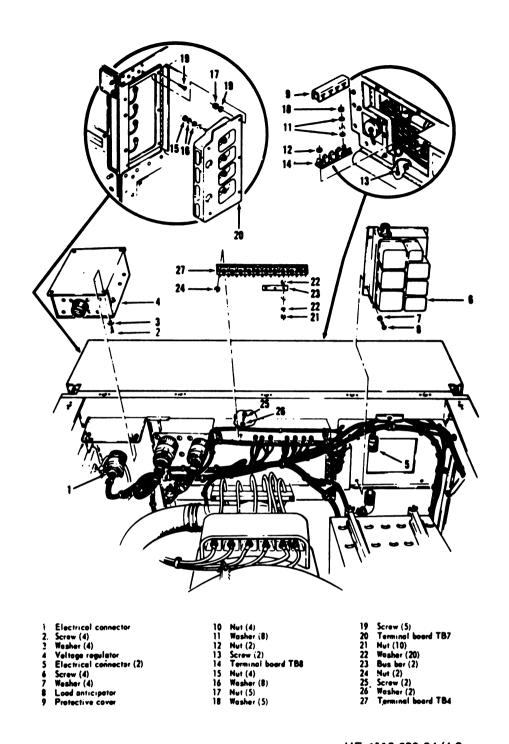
Voltage regulator assembly, load anticipator, and terminal boards (TB4, TB7 and TB8) removal and installation.
